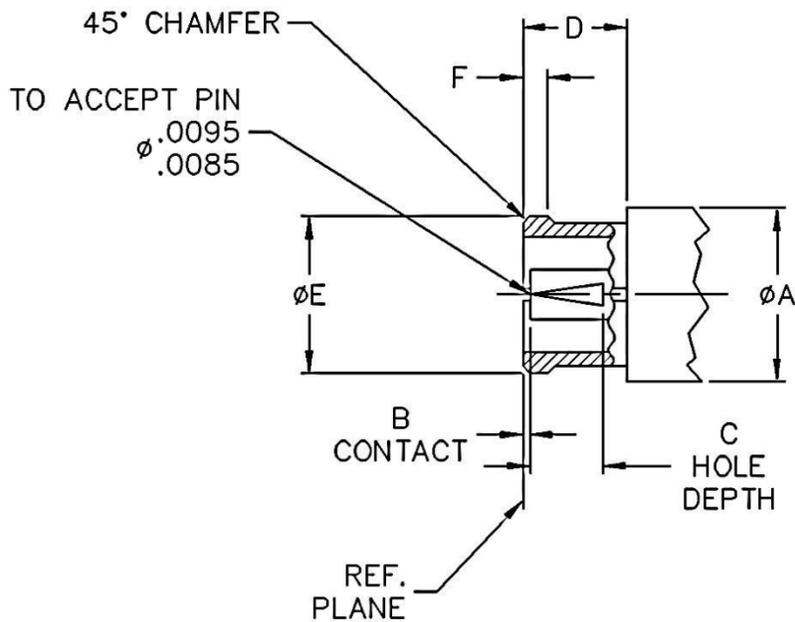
SMPS Connector with Pin Contact – Smooth Bore (for dimensions, see Table 2)
